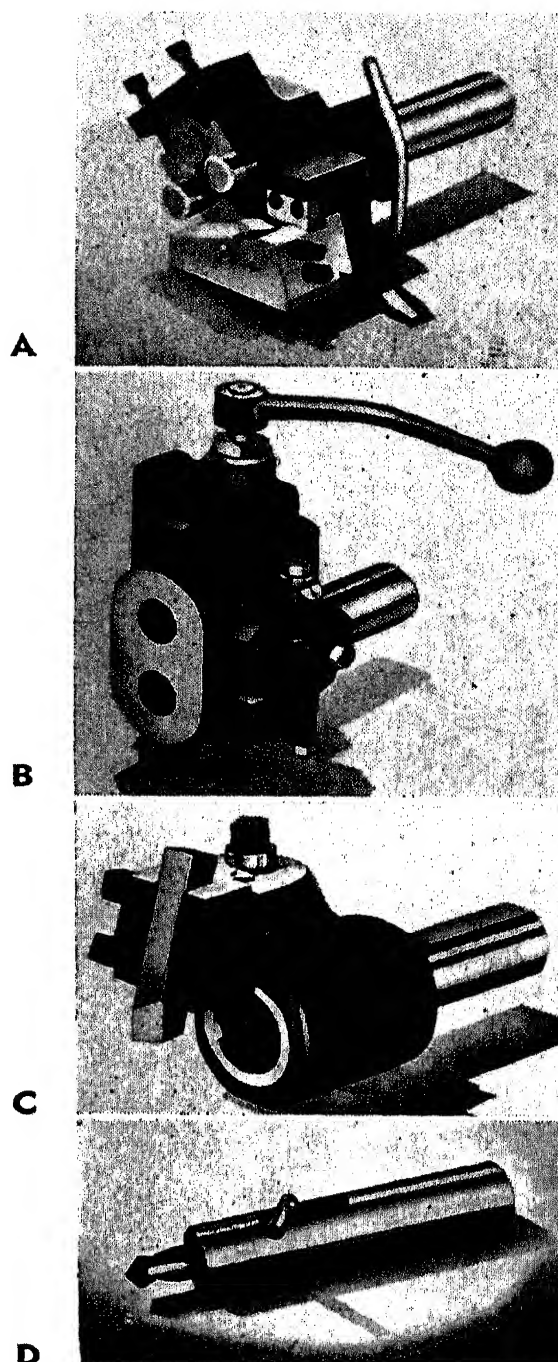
Examples of tooling equipment for bar work. A. Single cutter turner. B. Quick acting slide tool. C. Adjustable knee tool. D. Combination stock stop and starting drill. (Courtesy The Warner and Swasey Co.)
